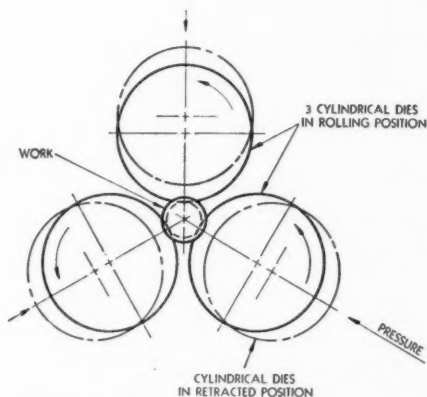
Cylindrical die thread-rolling machine—3-die type
